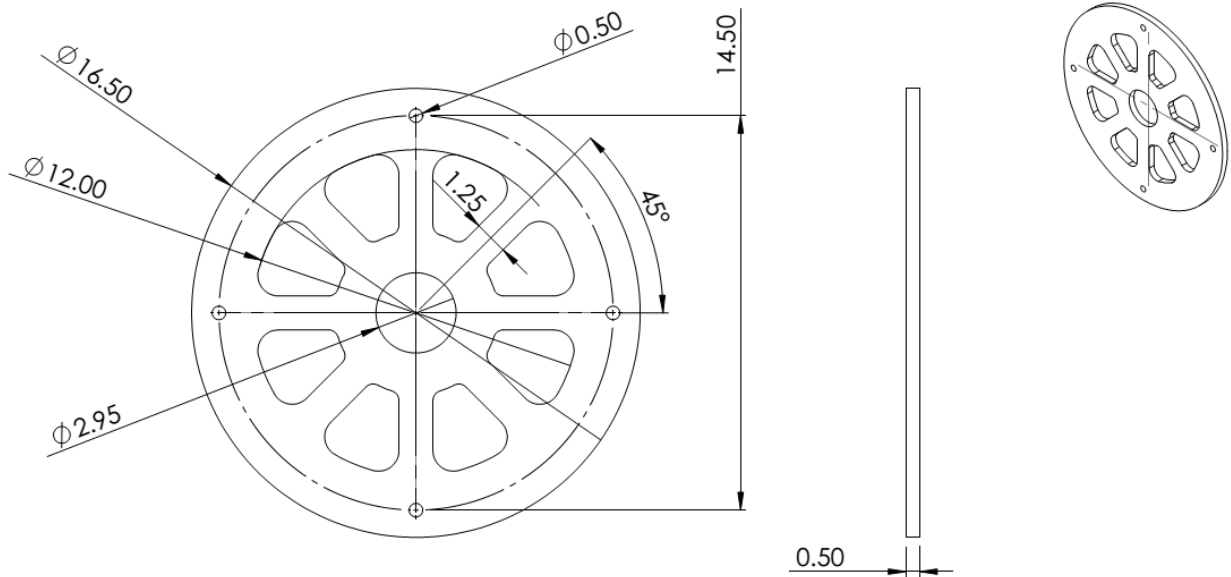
Detailed Dimensions of the Toroid Wheel Drive Plate
